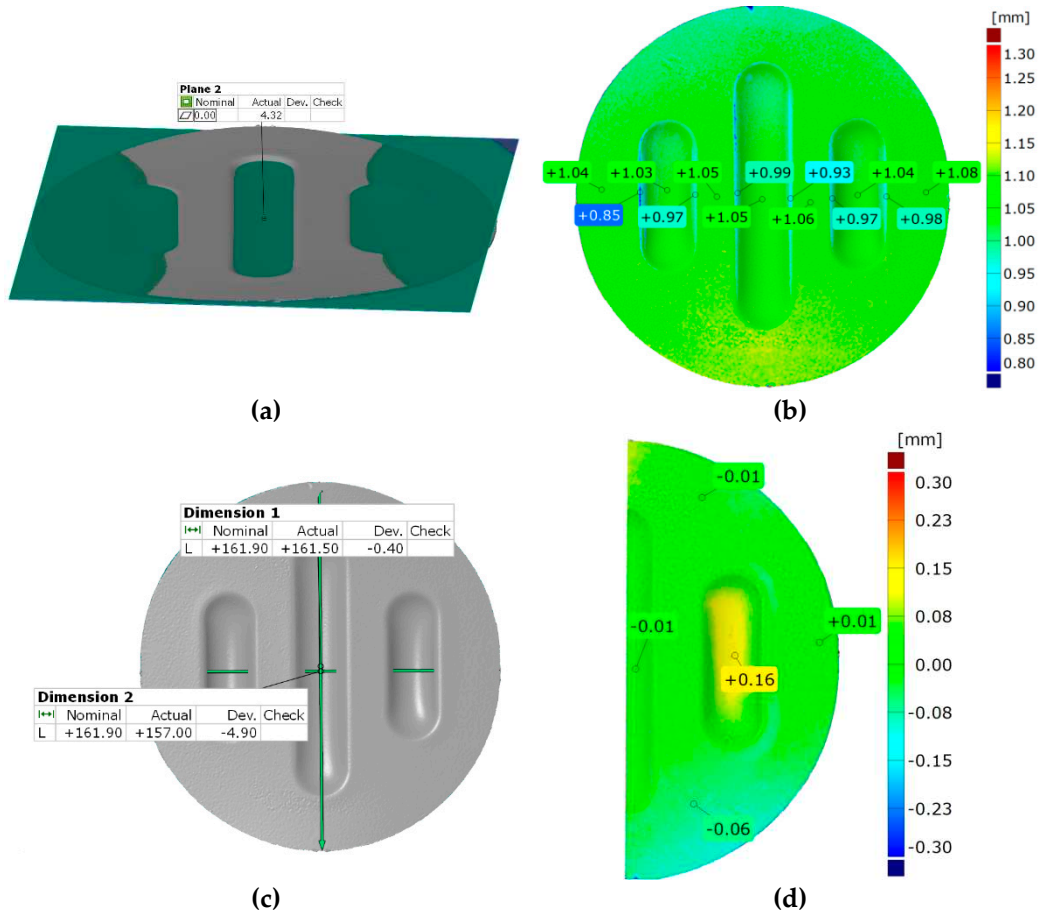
Results of measuring the geometry of the drawpieces formed using five inserts with a hardness of 50 ShA: (a) surface flatness, (b) thickness, (c) changes in the diameter of the workpiece, (d) uniformity of forming.
